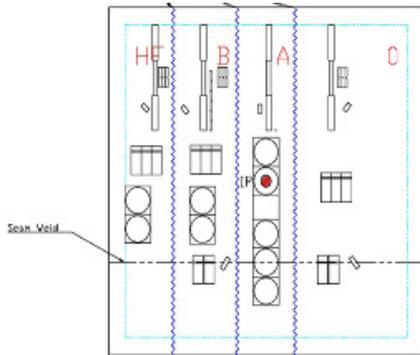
Testing specimen layout incorporating variety of DetaClad™ configurations.
